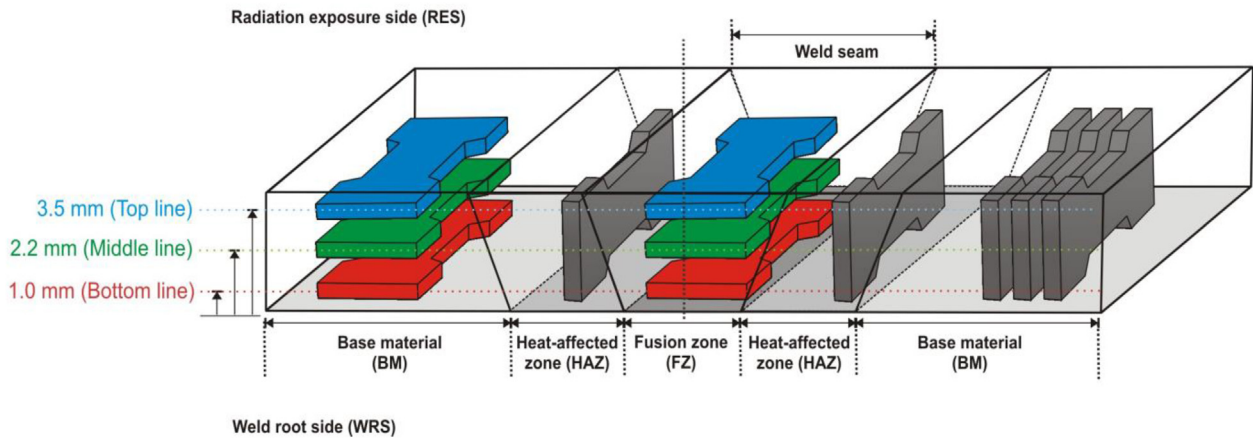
Schematic sketch of micro-flat tensile specimens, machined from laser beam-welded AA2198 joints.
